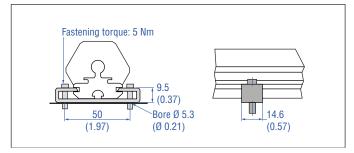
Mounting clamps (part no. 400 802) with cylinder screw M5×20
